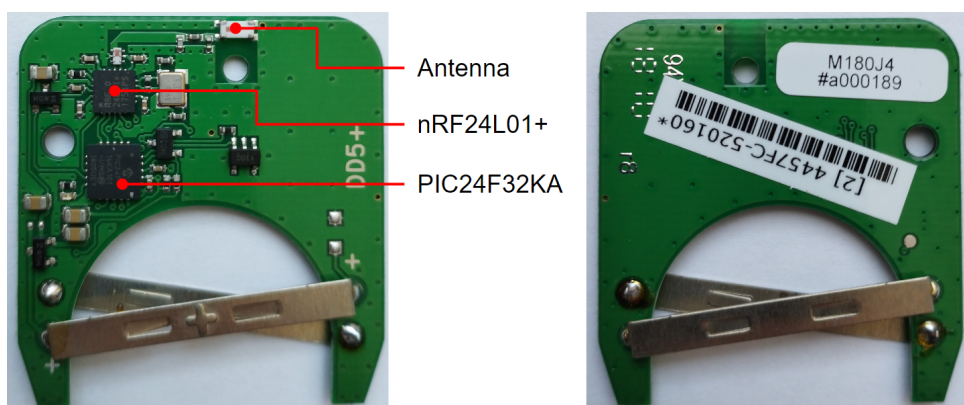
Top and bottom sides of the PCB of the tag of the Skybrake DD5 immobilizer
